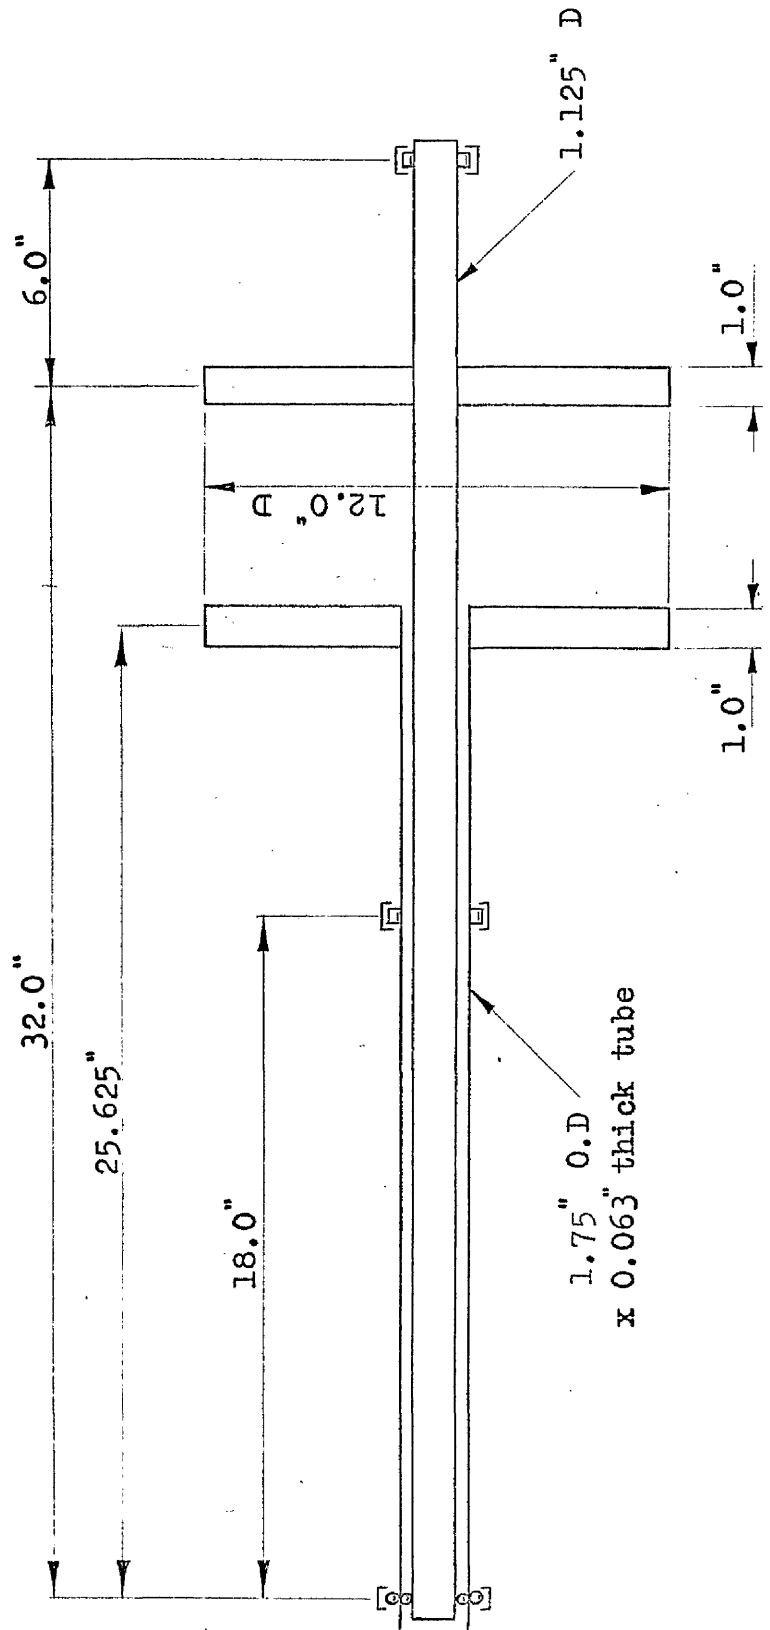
Major dimensions of H.P. and L.P. Rotors
